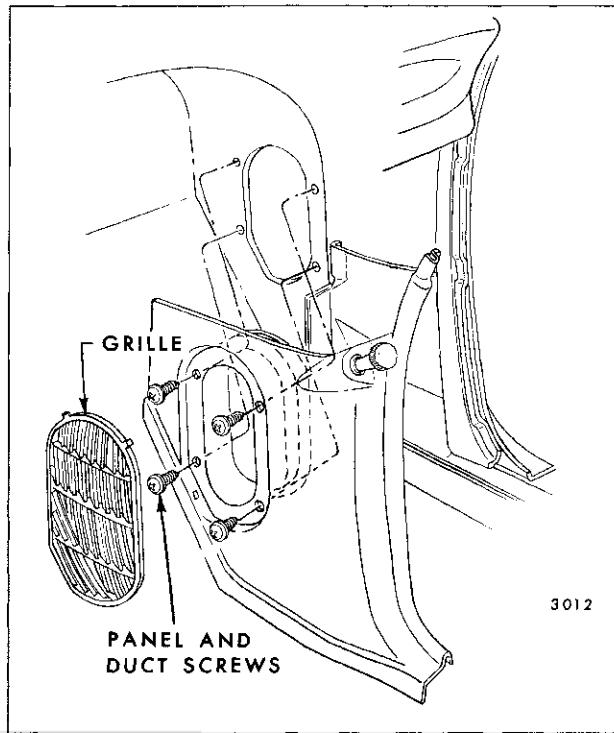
Shroud Side Finishing Panel and Air Outlet
